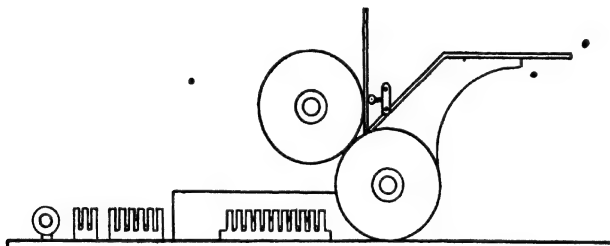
Feeding Arrangement on Tinplate Machine.
